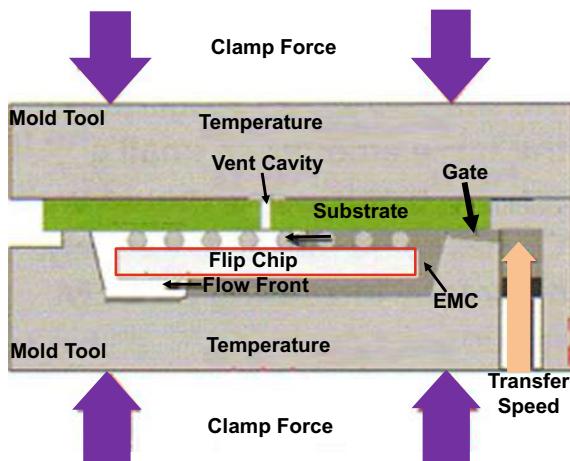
Flip chip assembly with C4 bumps and underfill
